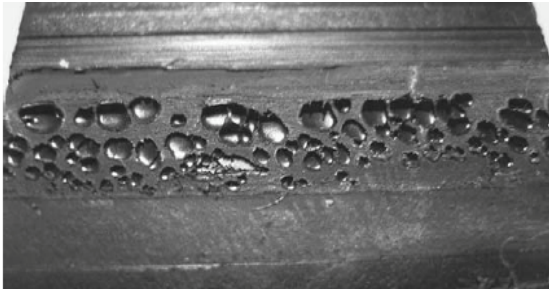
Example of moisture causing weld failure in a HDPE weld [Scheirs]
